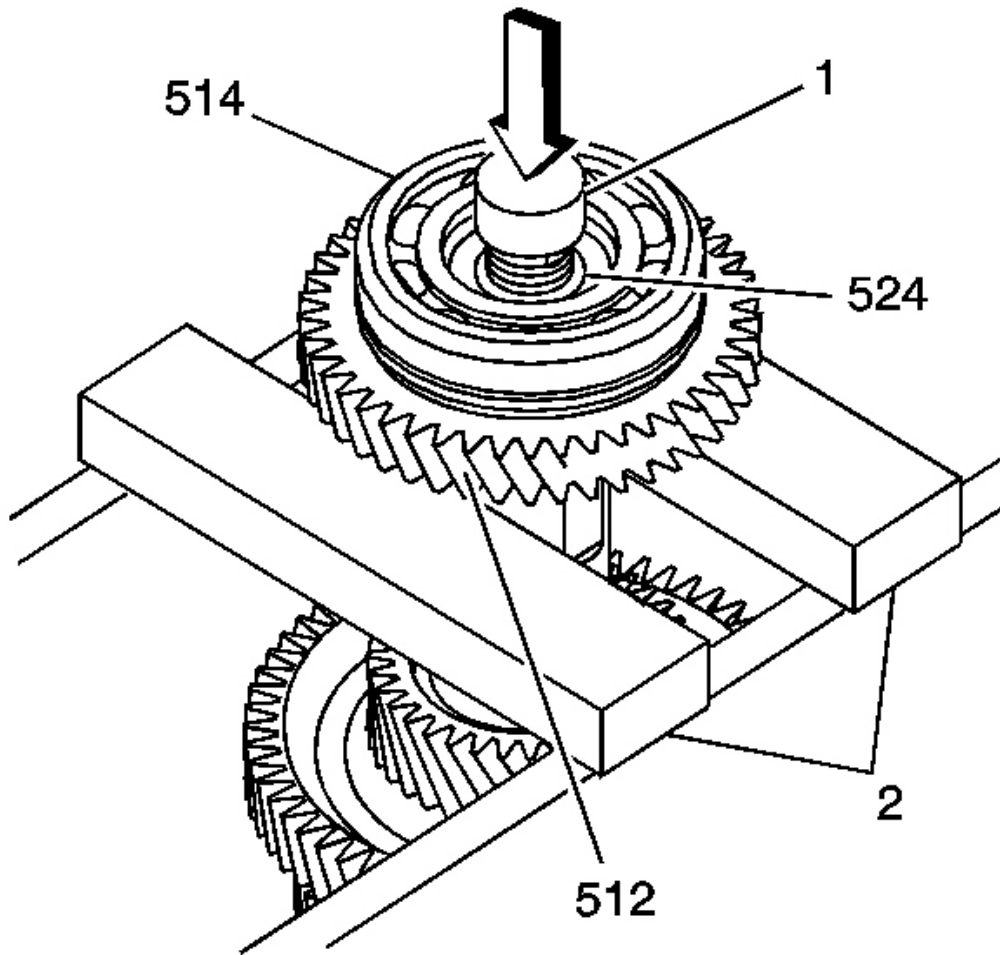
Removing The Output Shaft Rear Bearing Using A Hydraulic Press
